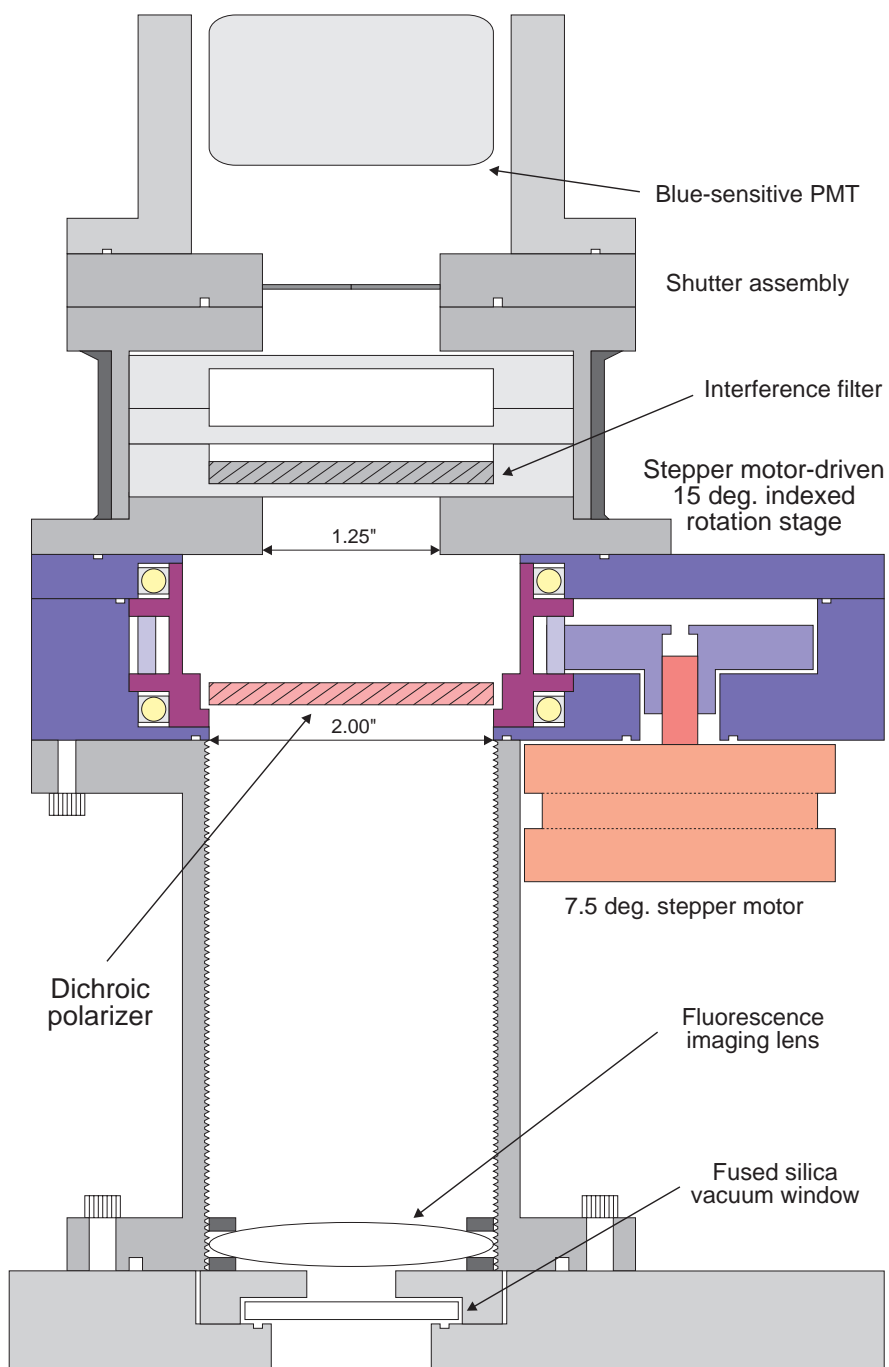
To-scale plan view of stepper-motor driven PMT stack.
